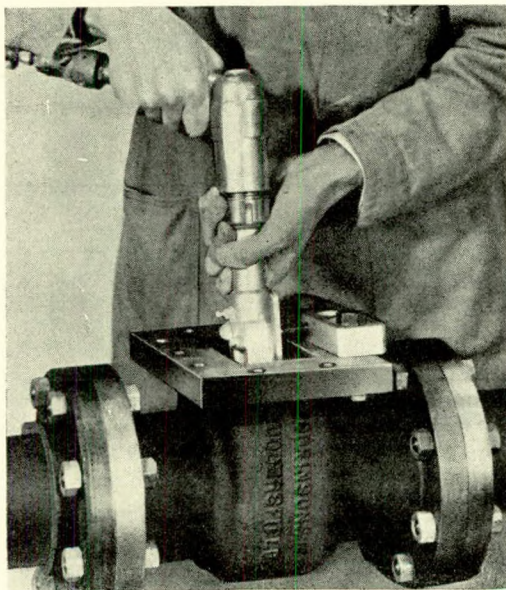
The Hopkinsons' automatic lapping machine in use on a 4-in. parallel-slide valve
